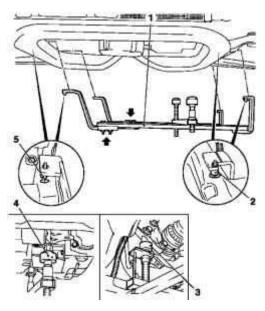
Installation of a special device KM-6001-A on the housing front axle: 1 - a special device, 2, 5 - neck, 3 - rear support 4 - front support
